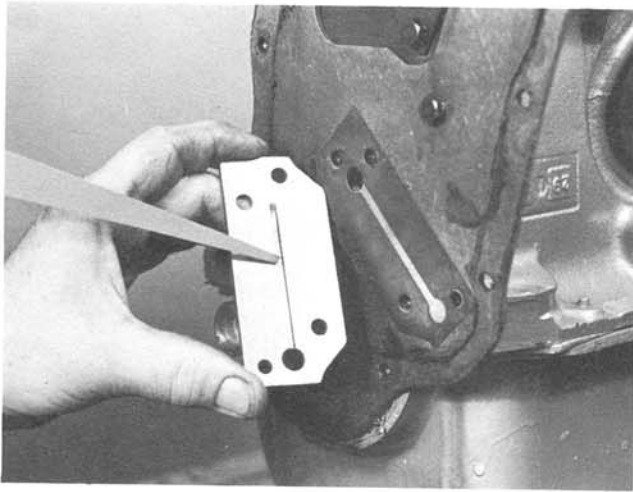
CHAIN TENSIONER OIL INPUT PLATE
